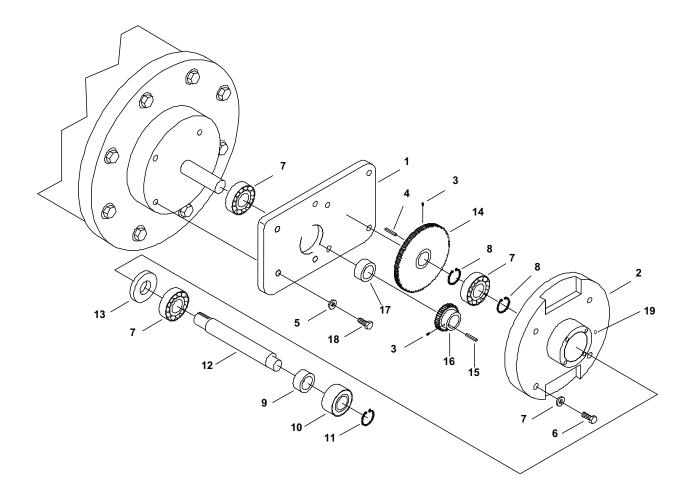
3:1 Gear Reducer Sub-Assembly.
